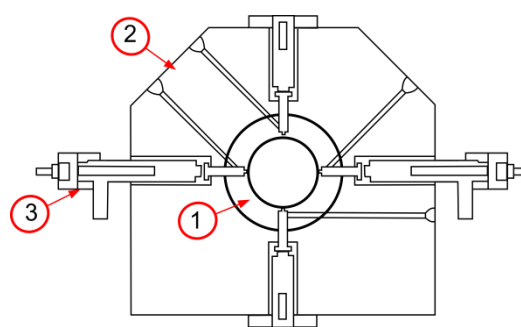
Gas journal bearing cross section and electro-mechanical subsystems built by piezoactuators [12].
